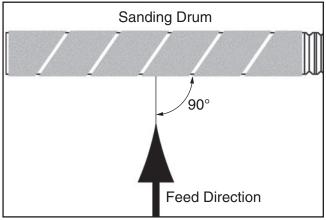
Feed direction perpendicular to sanding drum (viewed from top of machine).
